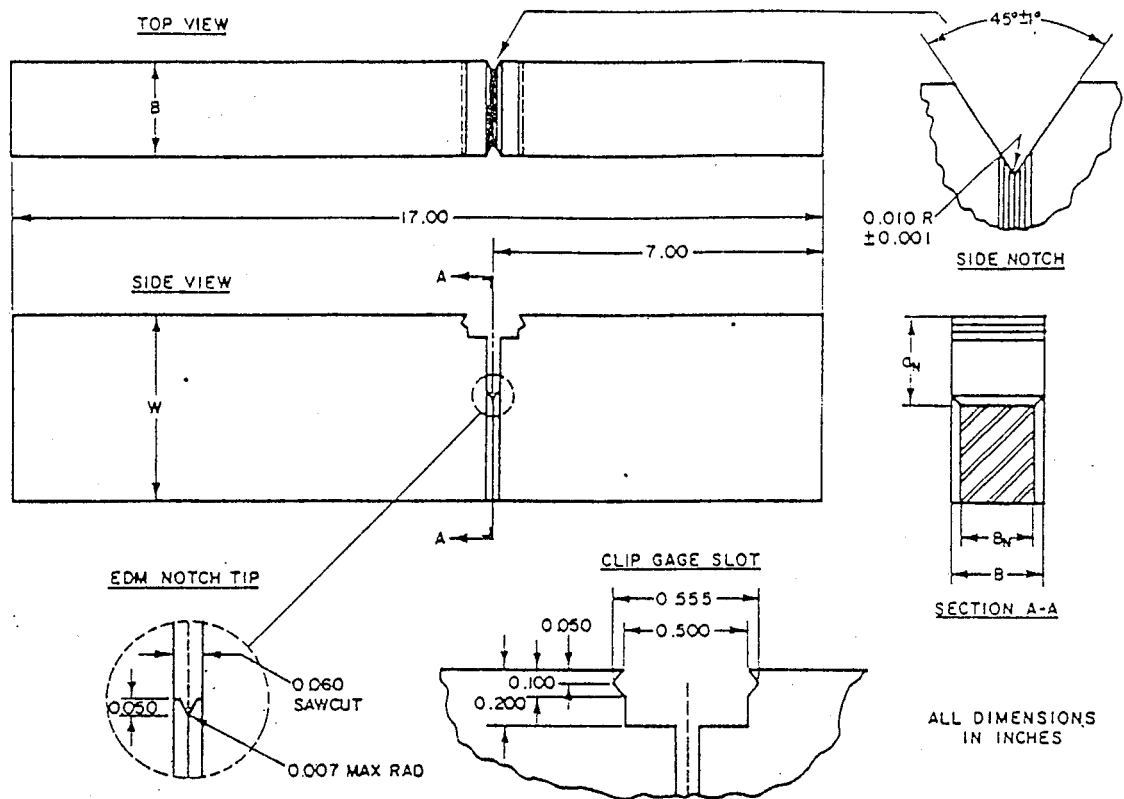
Fatigue-cracked cantilever-beam test specimen.
